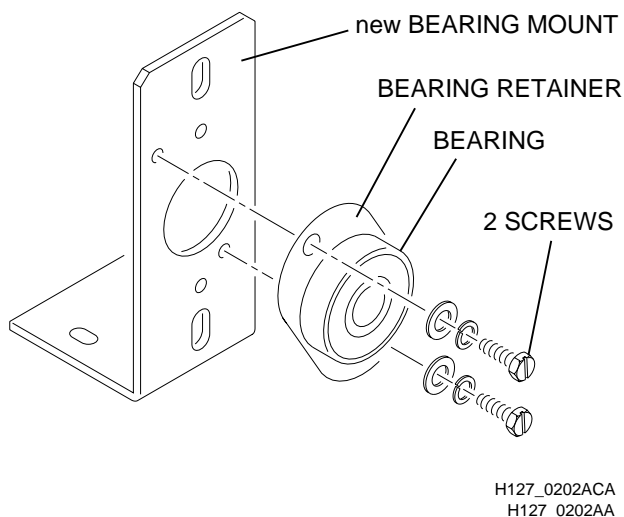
Installing the BEARING RETAINER on the New BEARING MOUNT
